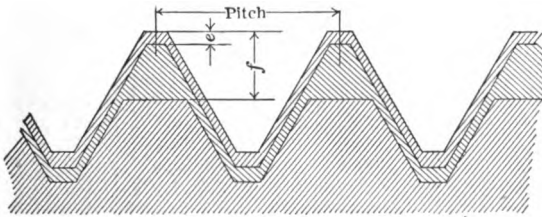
Section Showing Relative Amount Removed by each Tap in a Set of Three Taps, U. S. Standard Thread
